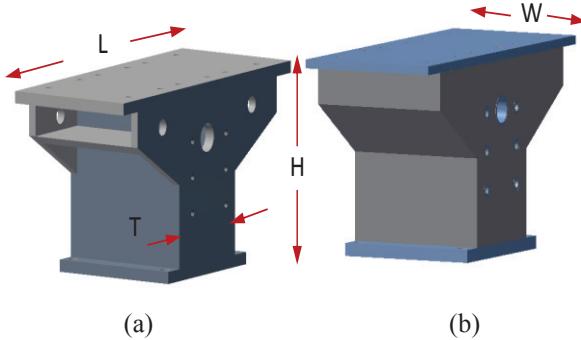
Hammerhead support columns – (a) welded steel construction, (b) from reinforced concrete with steel plates. Dimensions used in analyses are $H = 0.8 \text{ m}$, $L = 1.5 \text{ m}$, $W = 0.65 \text{ m}$, and $T = 0.5 \text{ m}$.
